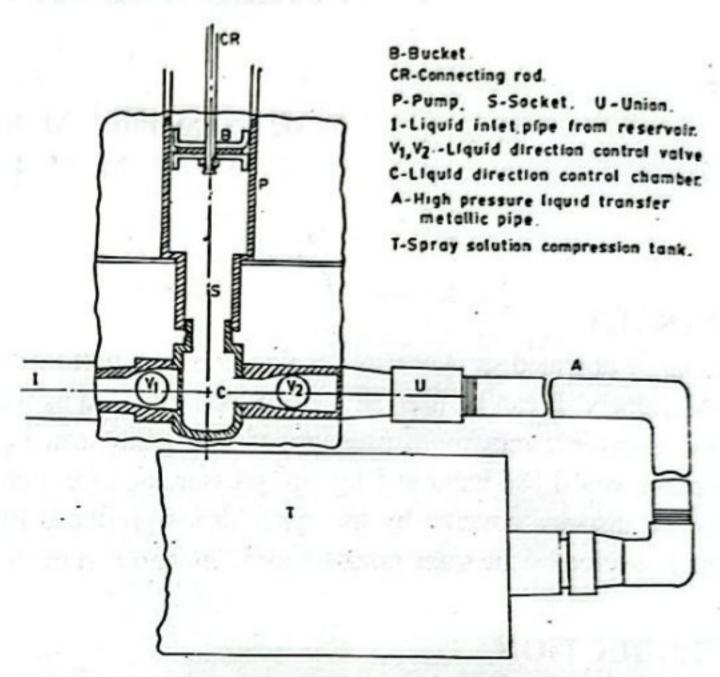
Arrangement of valves and bucket with pump cylinder sectional view.
